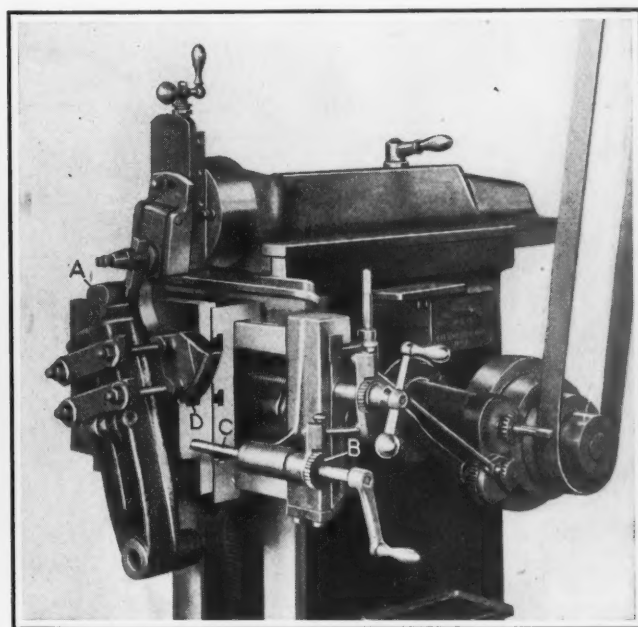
Use of Rotary Fixture for holding Shaper Rocker Arm to guide Work for shaping Bearing A
